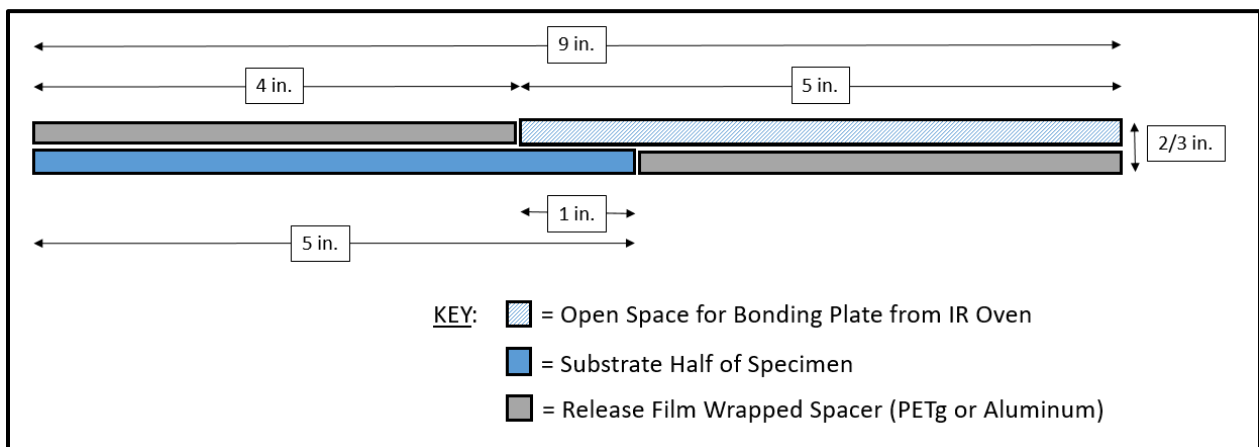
Cross-Sectional View of Stacking Positioning of Test Specimen
